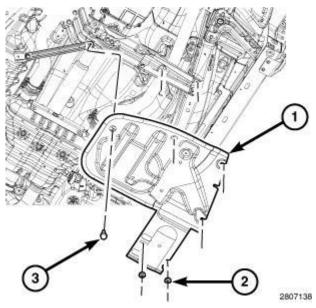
Skid Plate, Nuts & Fasteners Courtesy of CHRYSLER GROUP, LLC
